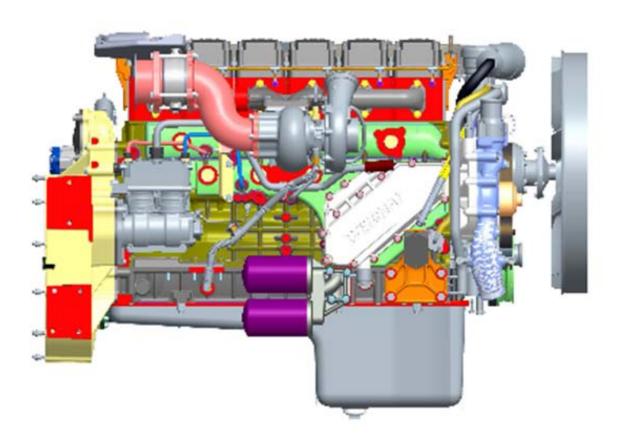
Outline drawing of WP12 four-valve Euro V series diesel engine
